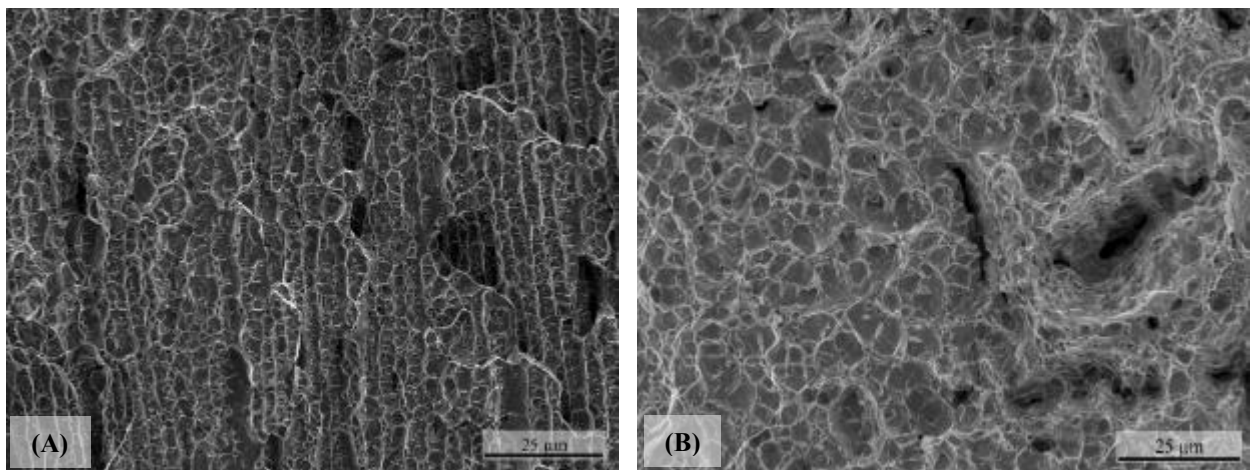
SEM images of fracture surfaces of failed EBM HIPed specimens. (A) Shows the fracture surface of EBM X orientation and (B) of Z orientation
